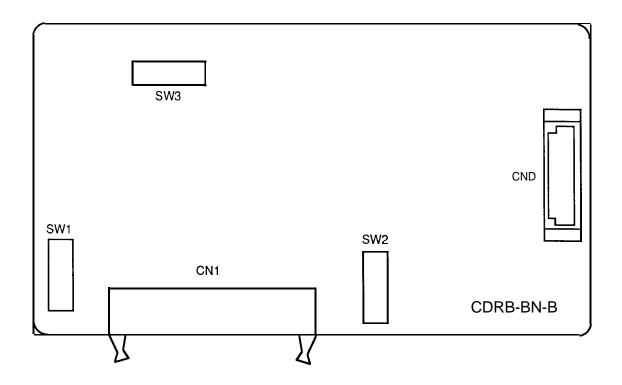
CDRB-BN-B SWITCH AND CONNECTOR LOCATIONS
